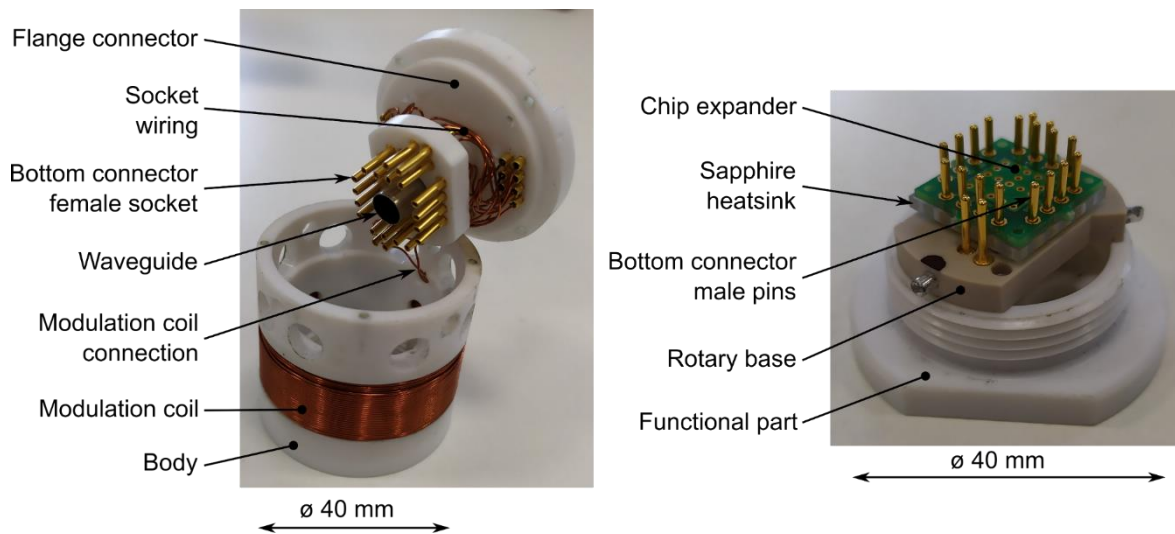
Chip sample holder prototype – disassembled – workshop CEITEC BUT.
